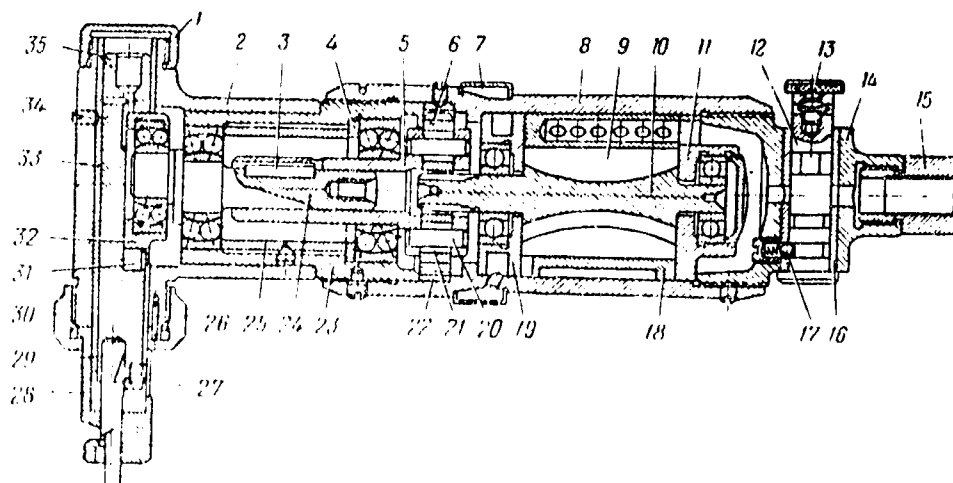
Pneumatic Cutting Shears (Cutters): 1 - head cover; 2 - head frame; 3 - keyway; 4 - support ring; 5 - guide; 6 - gear; 7 - exhaust ring; 8 - engine mounting; 9 - blade; 10 - rotor; 11 - rear cover of engine; 12 - valve of intake unit; 13 - valve head; 14 - cover of engine housing, where the intake unit is installed; 15 - connecting piece; 16 - engine bushing; 17 - retaining unit; 18 - stator; 19 - front engine cover; 20 - roller; 21 - needles; 22 - crown gear; 23 - reducing gear frame; 24 - crankshaft; 25 - bushing; 26 - pin; 27 - screw; 28 - die (matrix); 29 - punch; 30 - union nut; 31 - roller; 32 - connecting (piston) rod; 33 - bushing; 34 - screw; and 35 - slide block.
